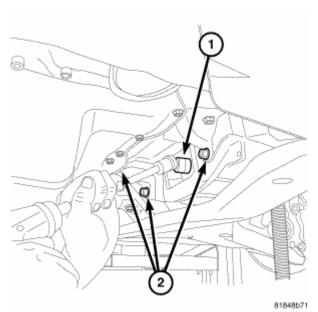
MODULAR CLUTCH TO FLEX PLATE BOLTS Courtesy of CHRYSLER LLC
